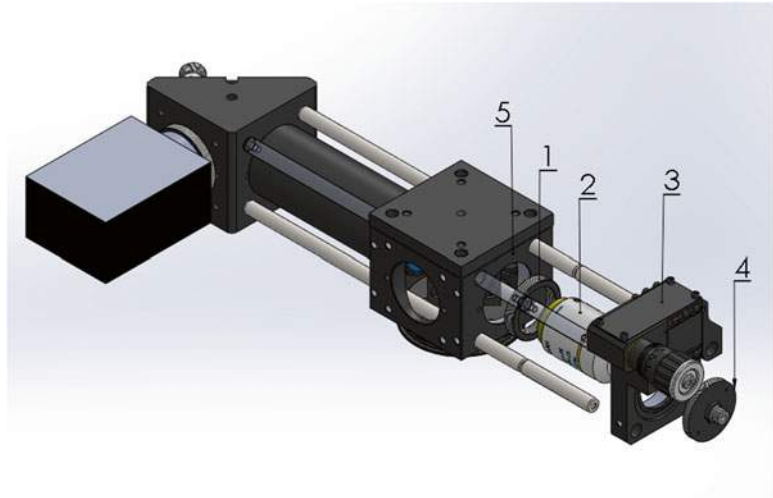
An exploded view showing the installation of [2] the objective lens into [5] the cage cube using an [1] RMS to SM1 adapter and the installation of [3] the Z-translating stage and [4] the SMA fiber mount
